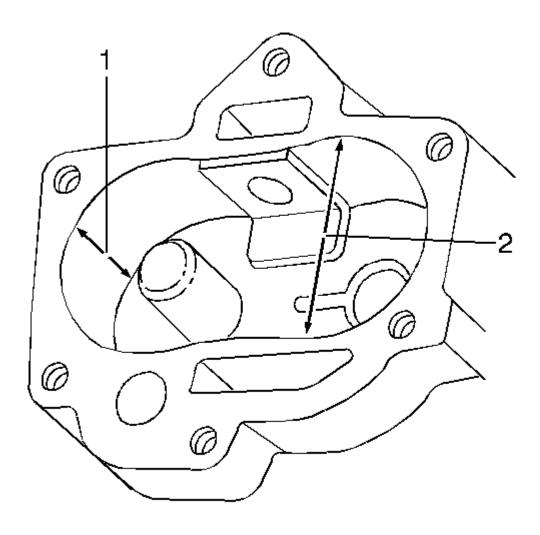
Measuring Oil Pump Gear Lash Courtesy of GENERAL MOTORS CORP.
